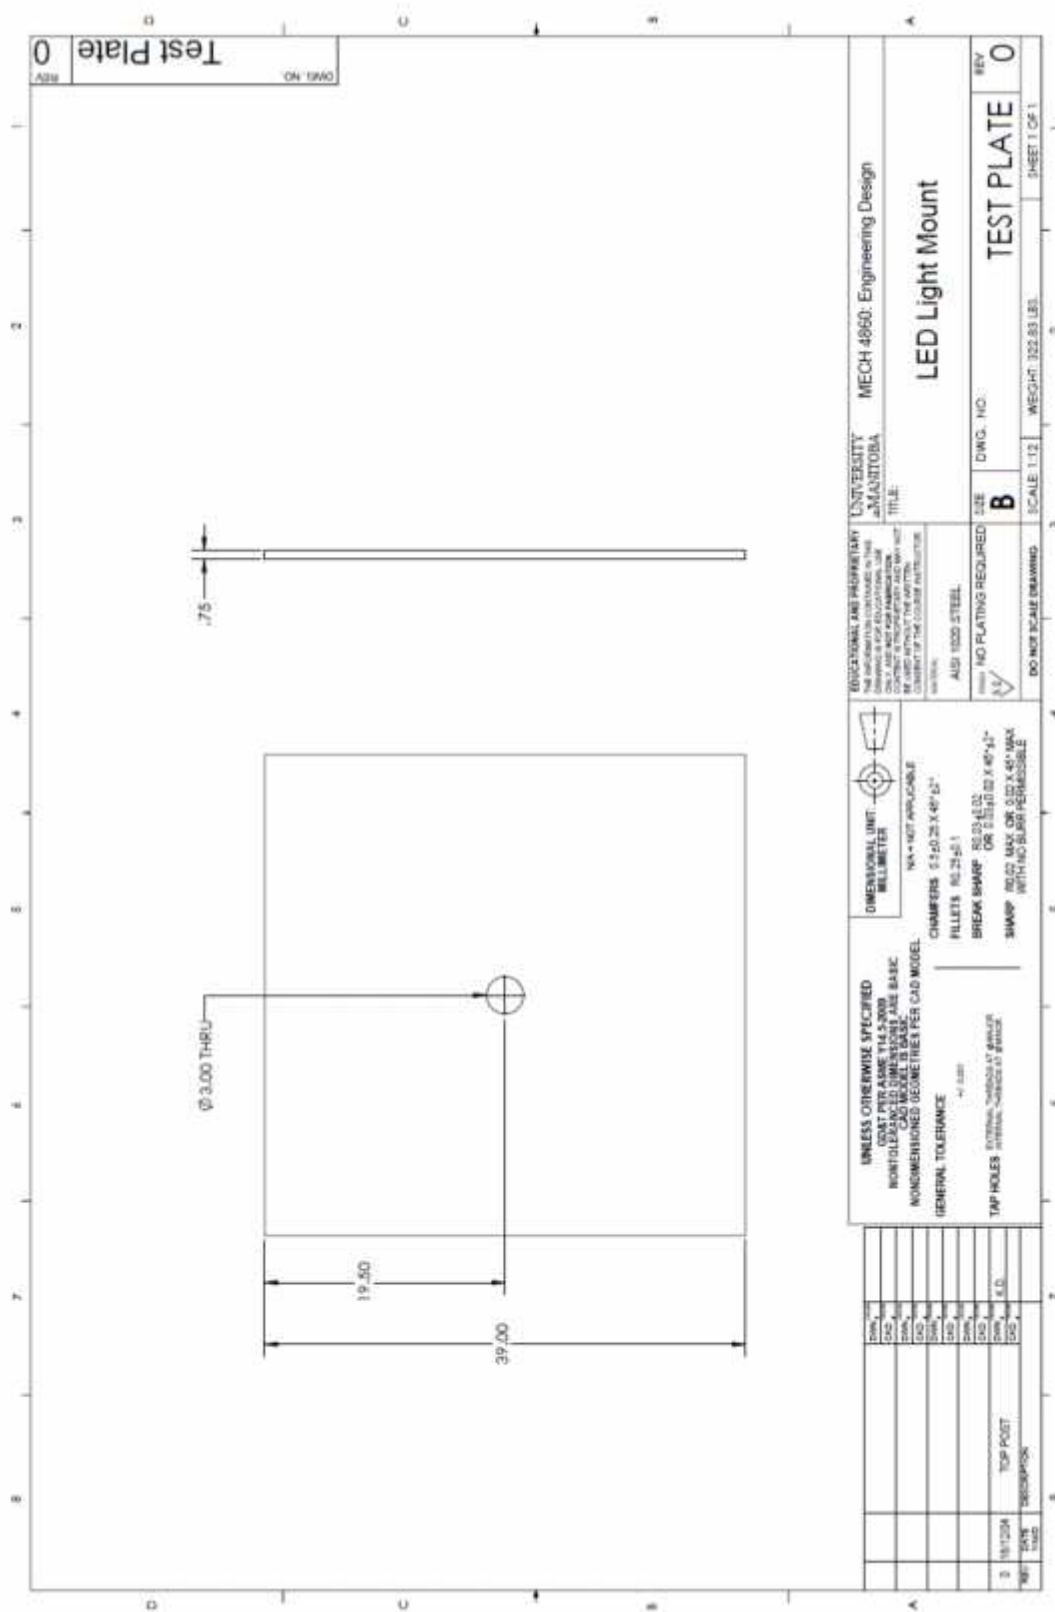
Technical drawing for the Test Plate [4] used with permission.
